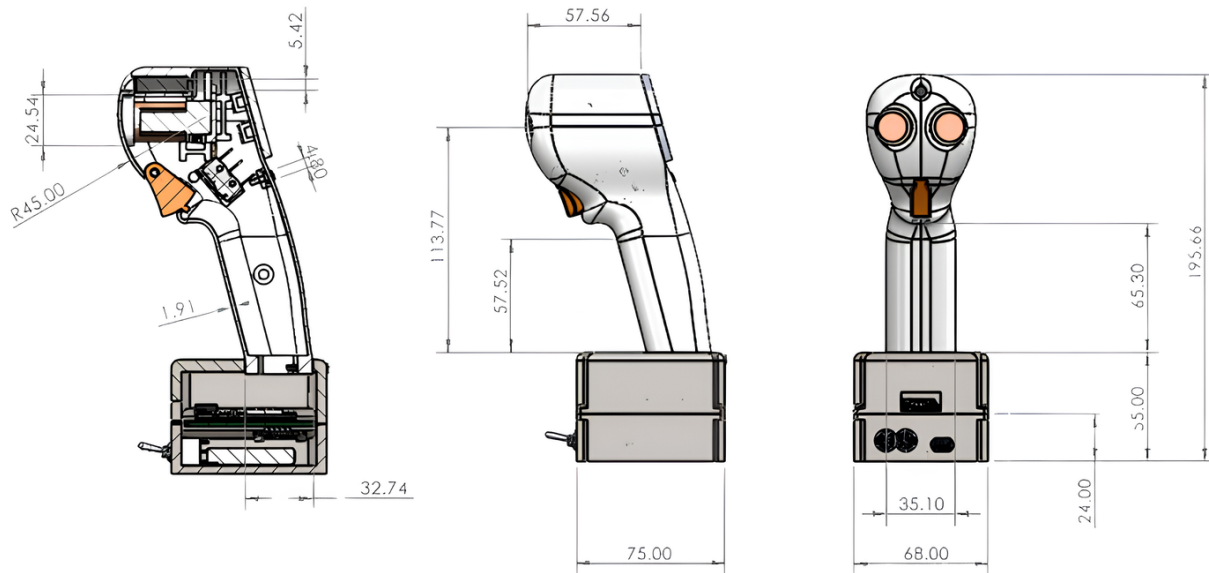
Dimensions of the final version handheld platform with cross-sectional view
